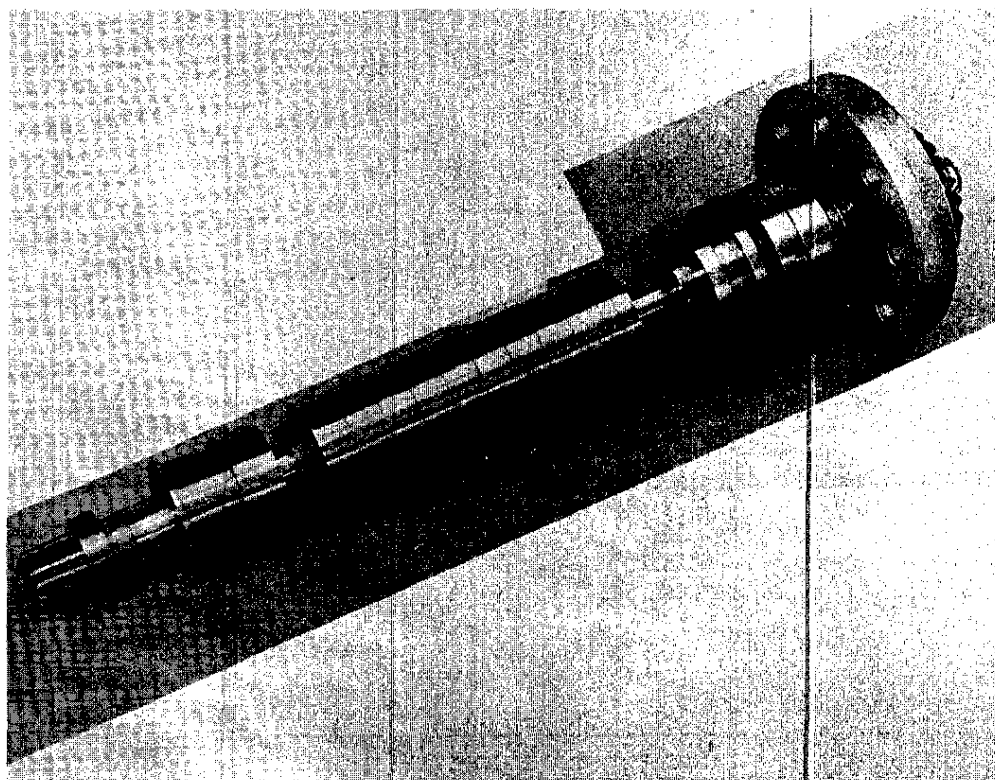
SEAL SHAFT ASSEMBLY AFTER ONE YEAR OF SERVICE
